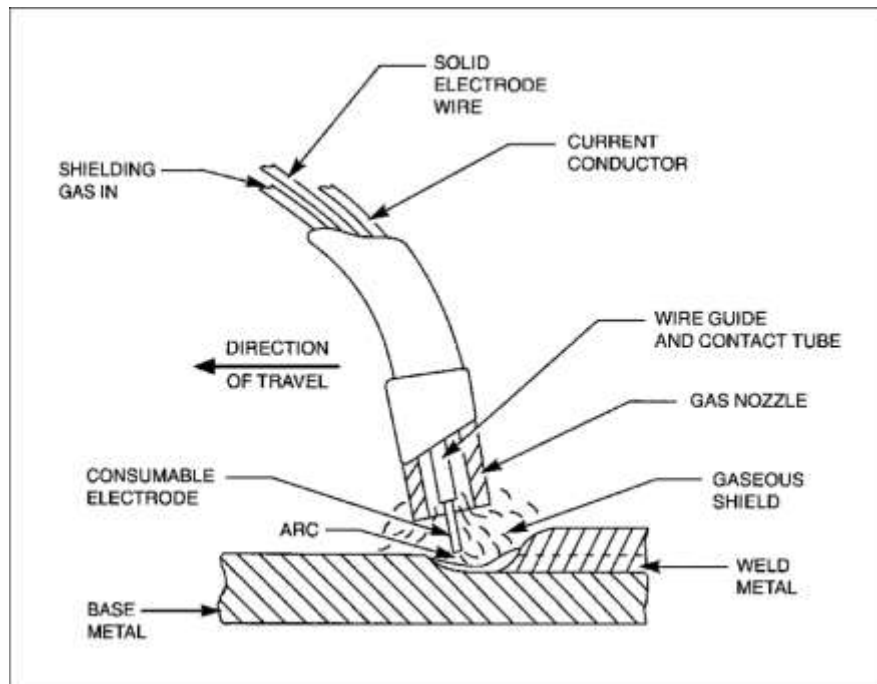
Gas arc welding GMAW (Malcom, 2000)
